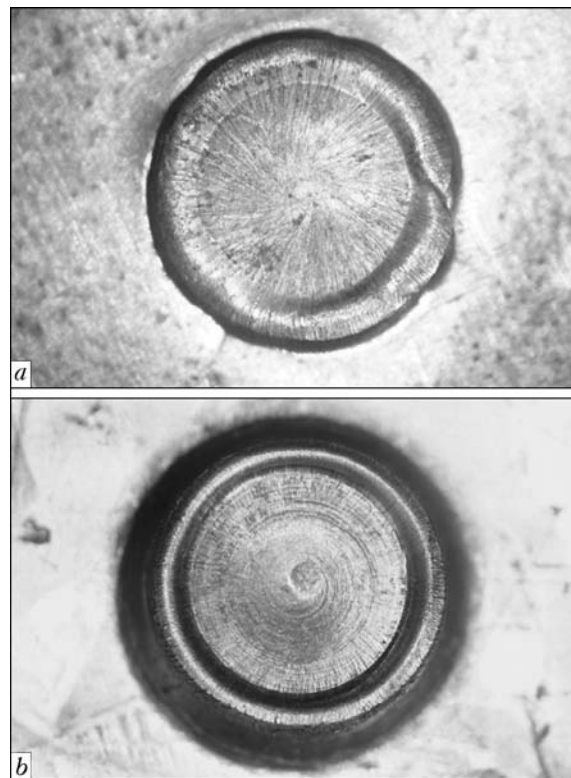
Mechanical lock on the die side in clinch- (*a*) and TOX-joints (*b*)
